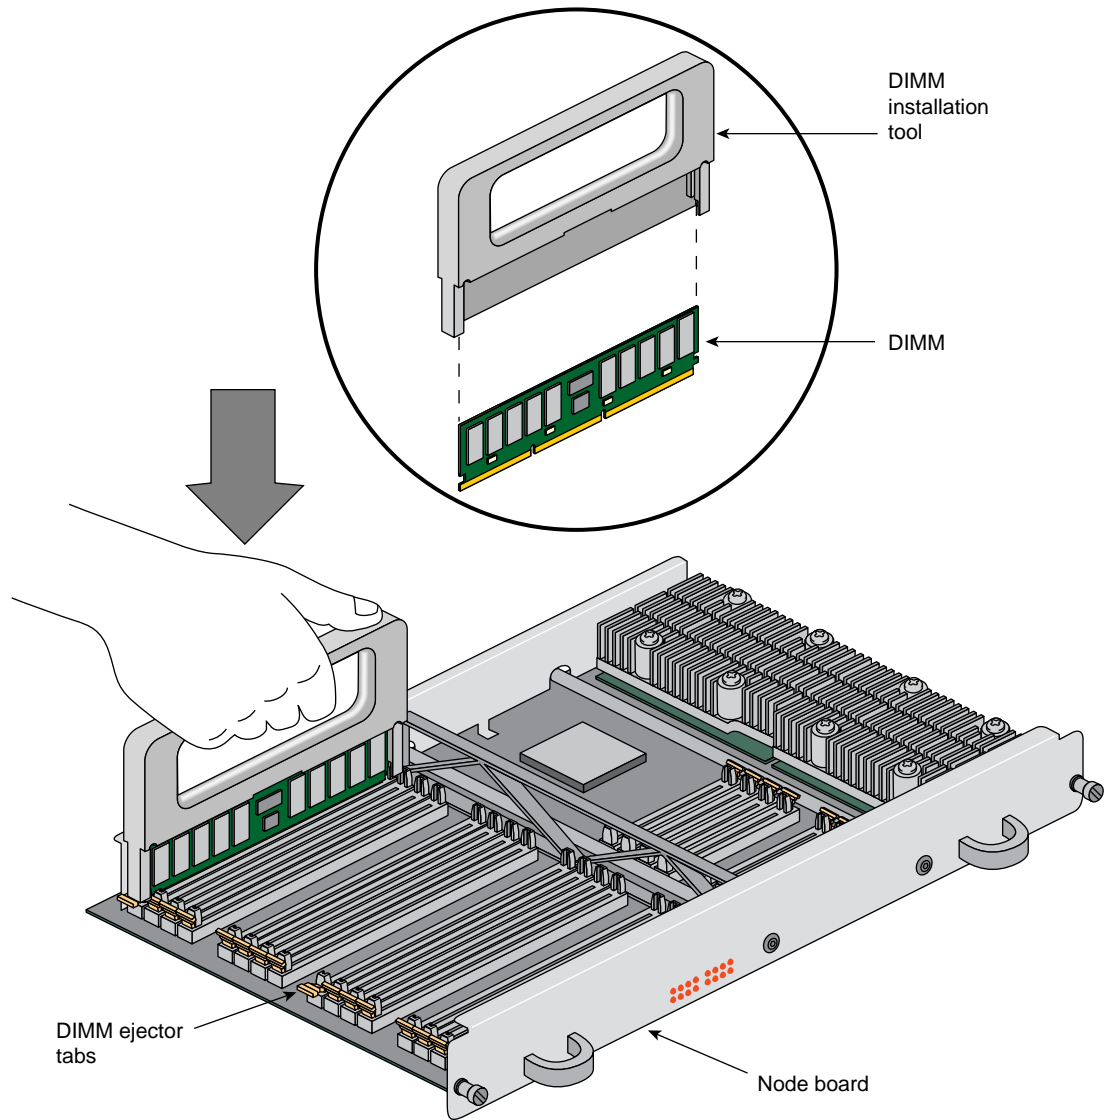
Installing DIMMs With the DIMM Installation Tool
